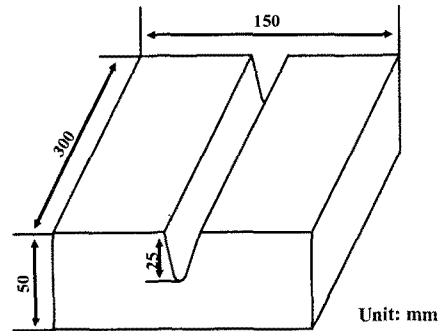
Geometry of multipass restraint weld cracking test specimen.
